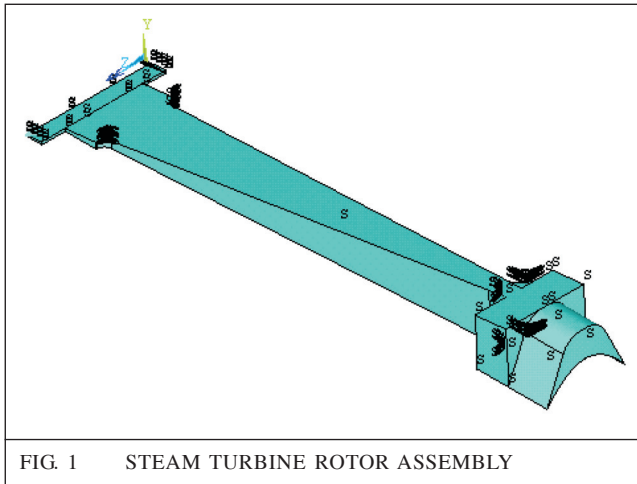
STEAM TURBINE ROTOR ASSEMBLY
